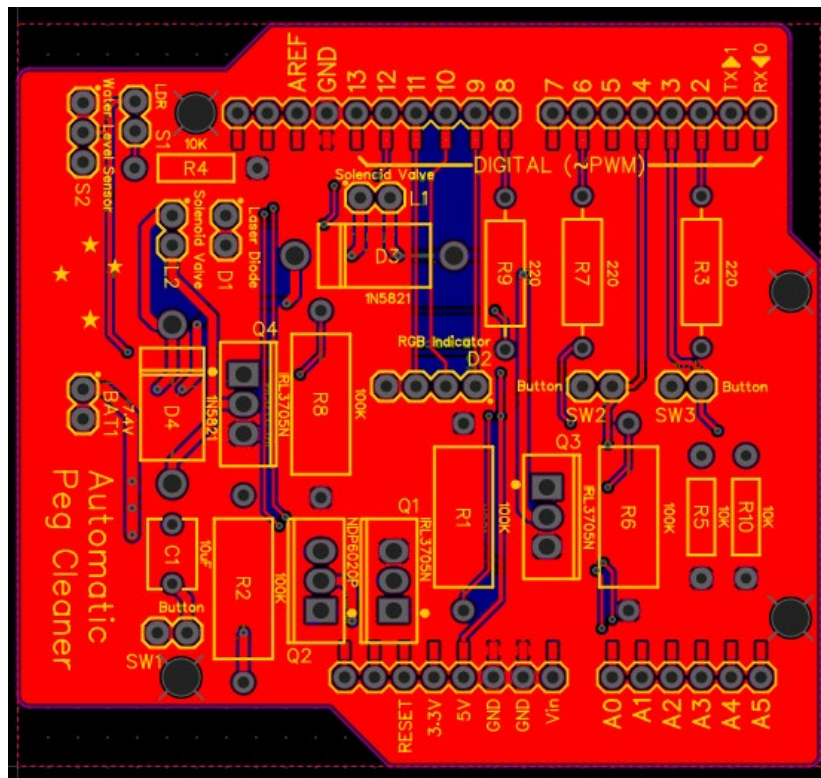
Fabrication PCB top layer, before re-design with more appropriate components
